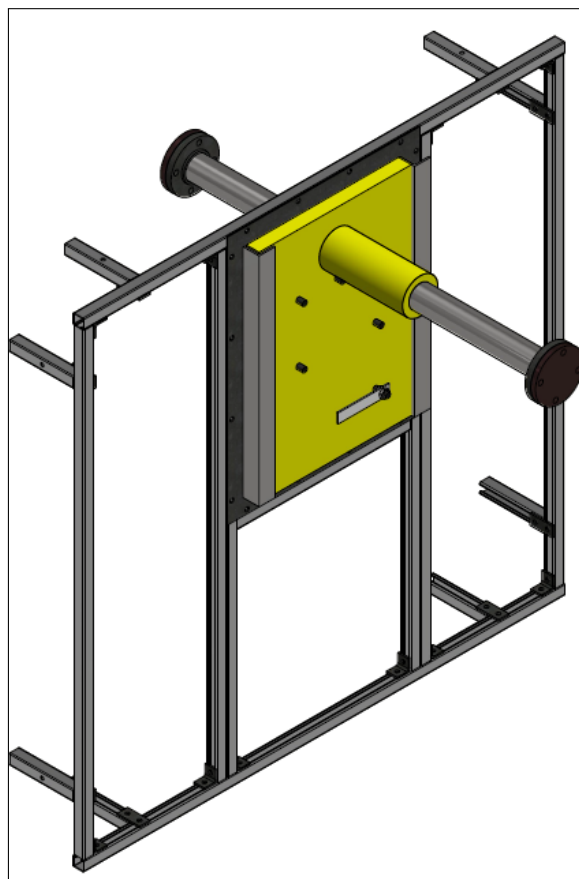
Navy bulkhead test specimen assembly bolted onto the Unistrut® frame for mounting on the test apparatus wall frame
